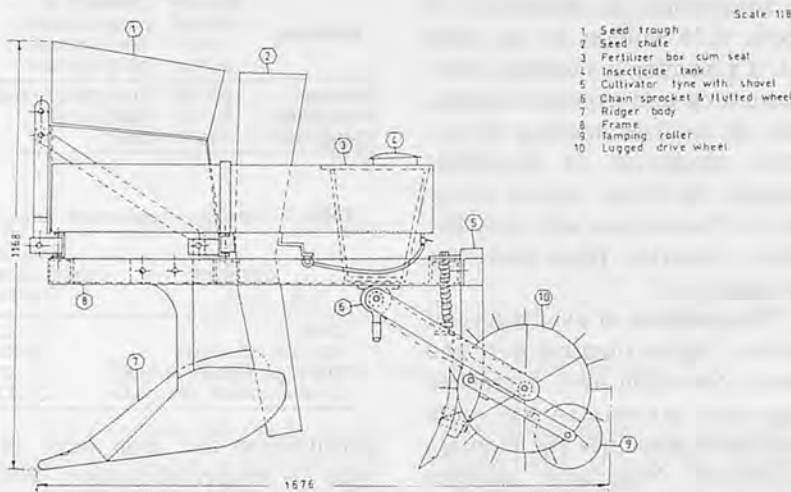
IISR Improved semi-automatic tractor drawn sugarcane planter.
